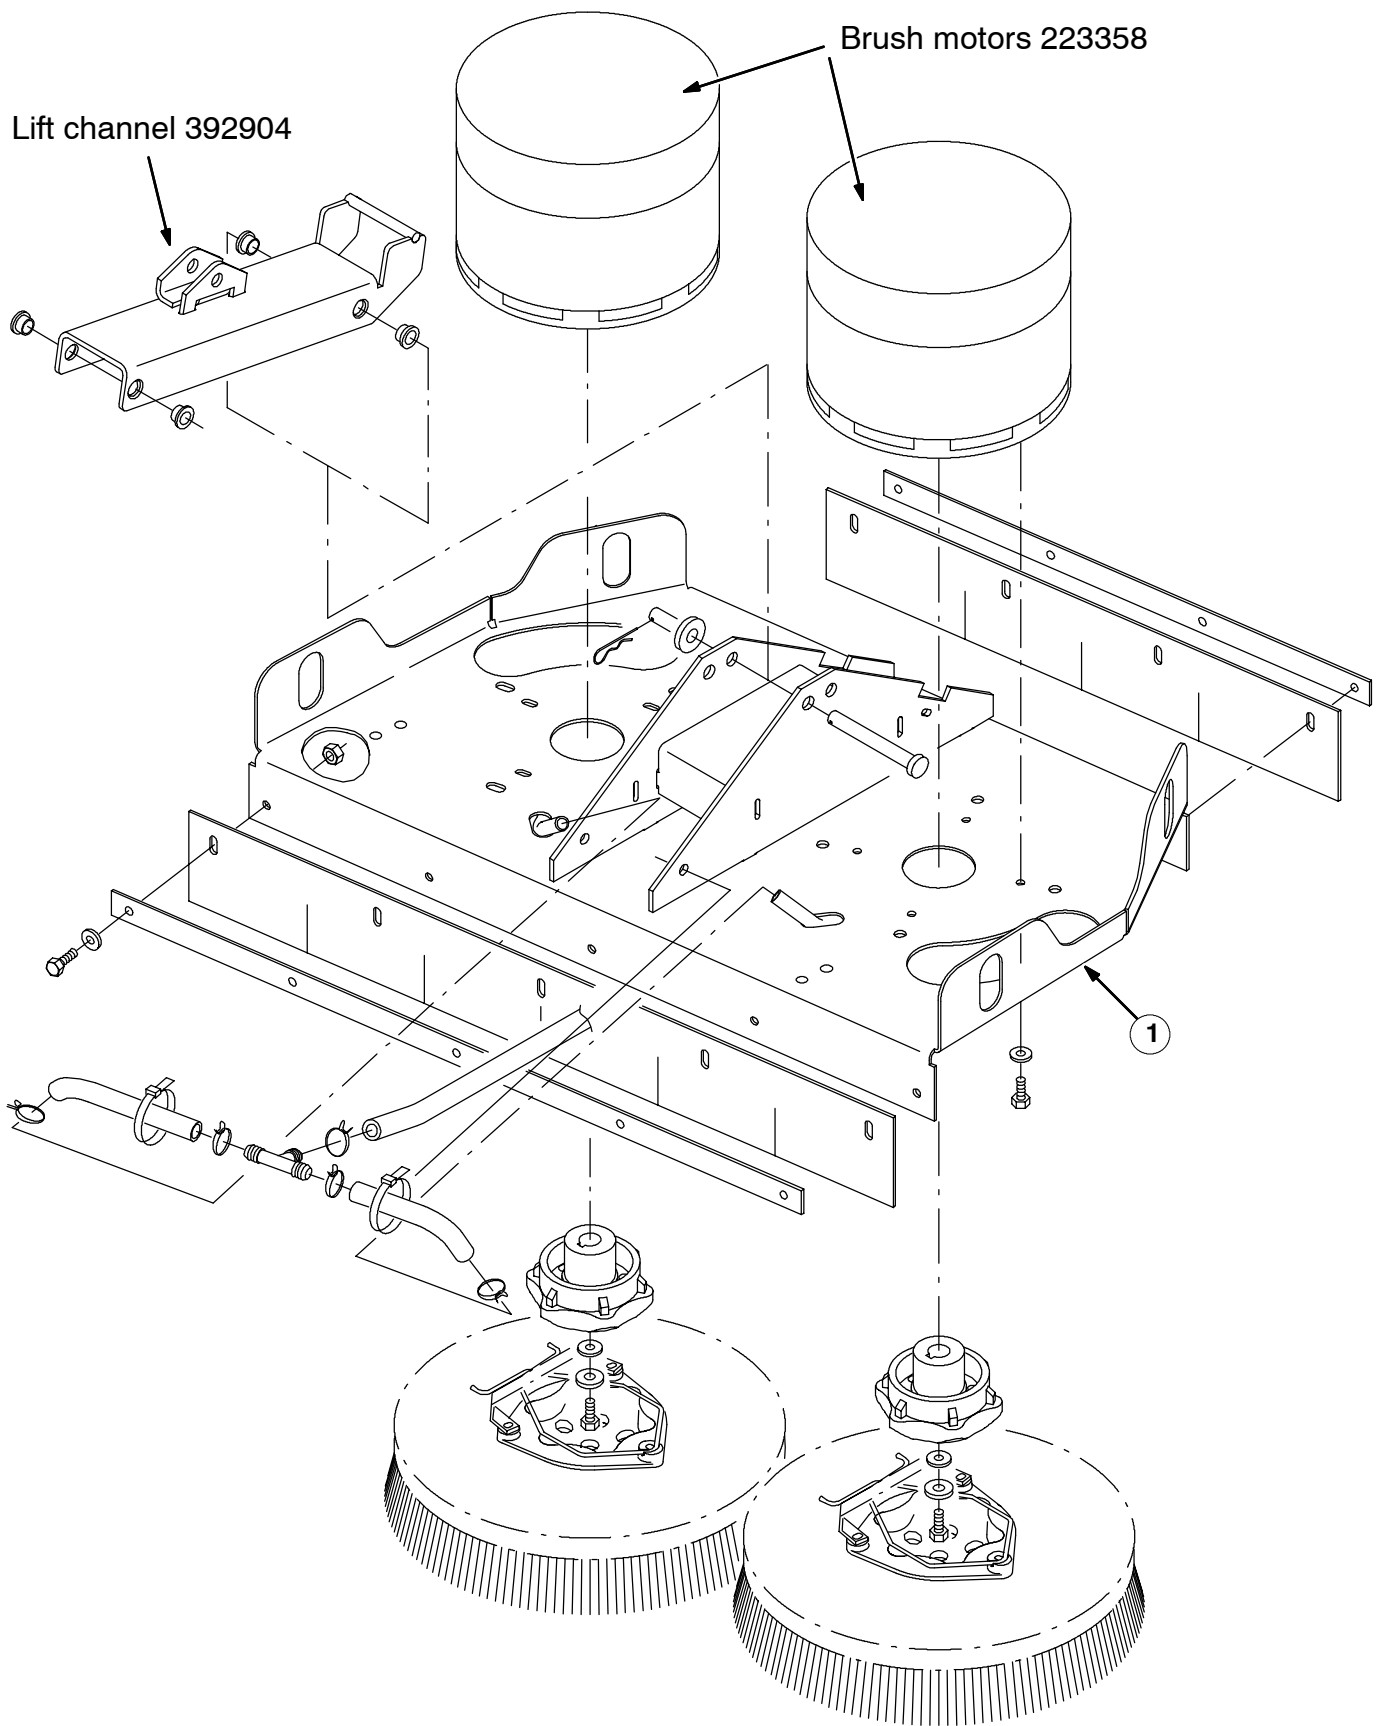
Disk Scrub Head Drive Motor Group, 800 mm (32 in)
